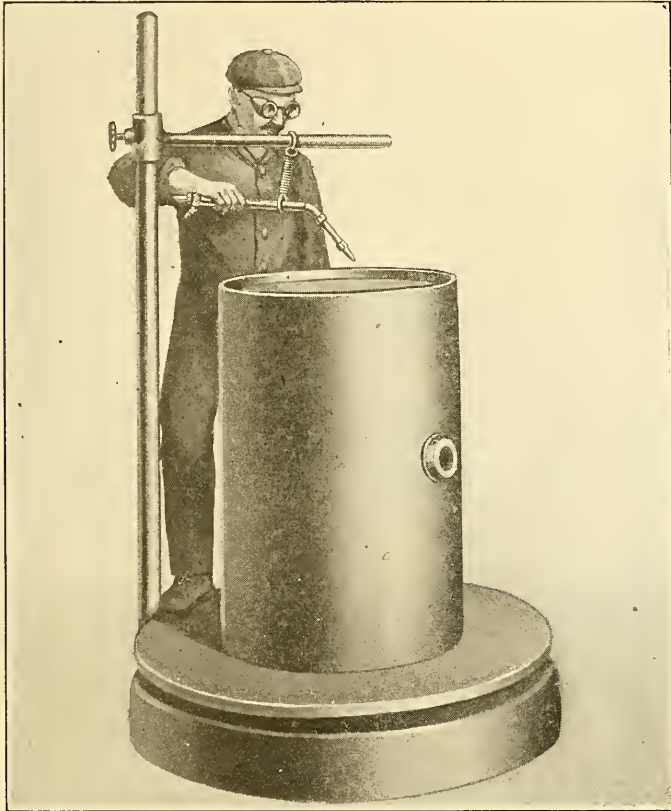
Apparatus for Welding Ends in Cylinder or Tanks.
